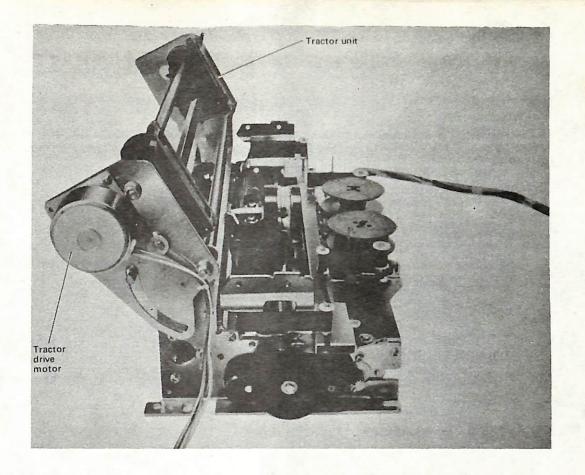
Construction of Model-3110 / Type T (as viewed from the frame A side)
